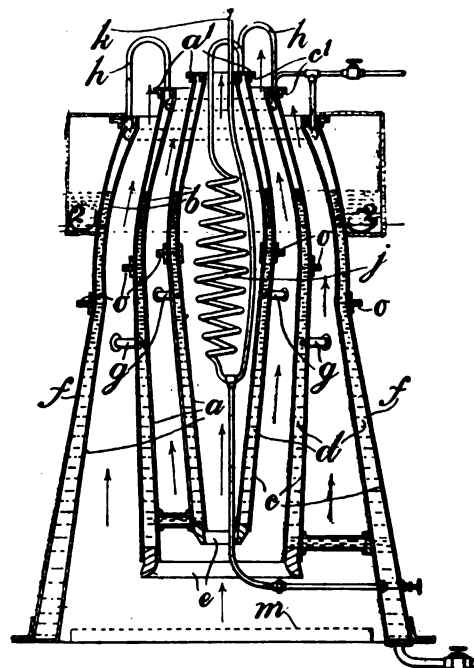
Sectional Elevation of Steward's Tubeless Semi-Flash Boiler.
